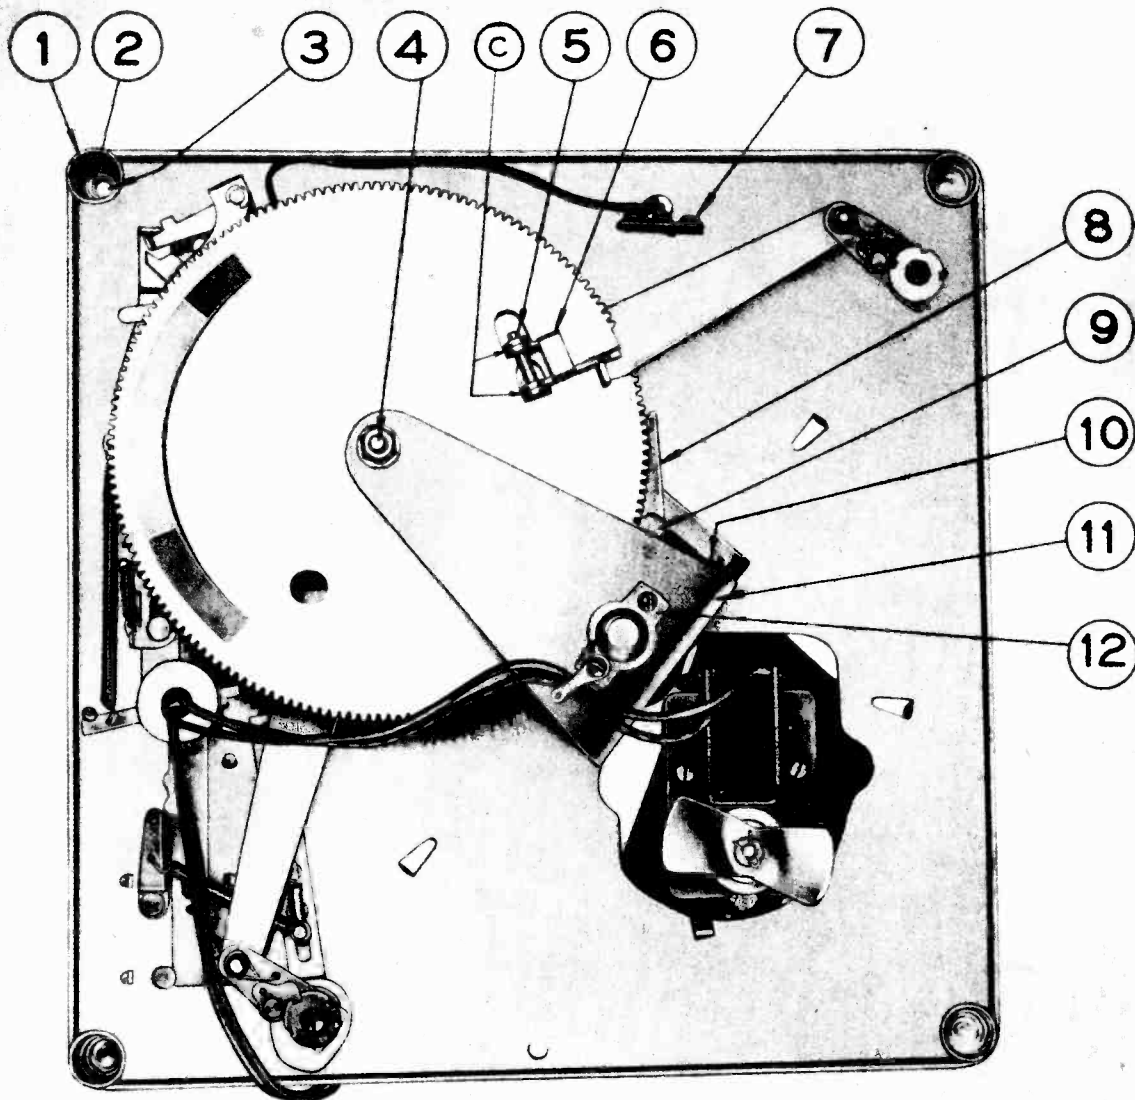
TOP VIEW OF RECORD CHANGER, DISASSEMBLED
